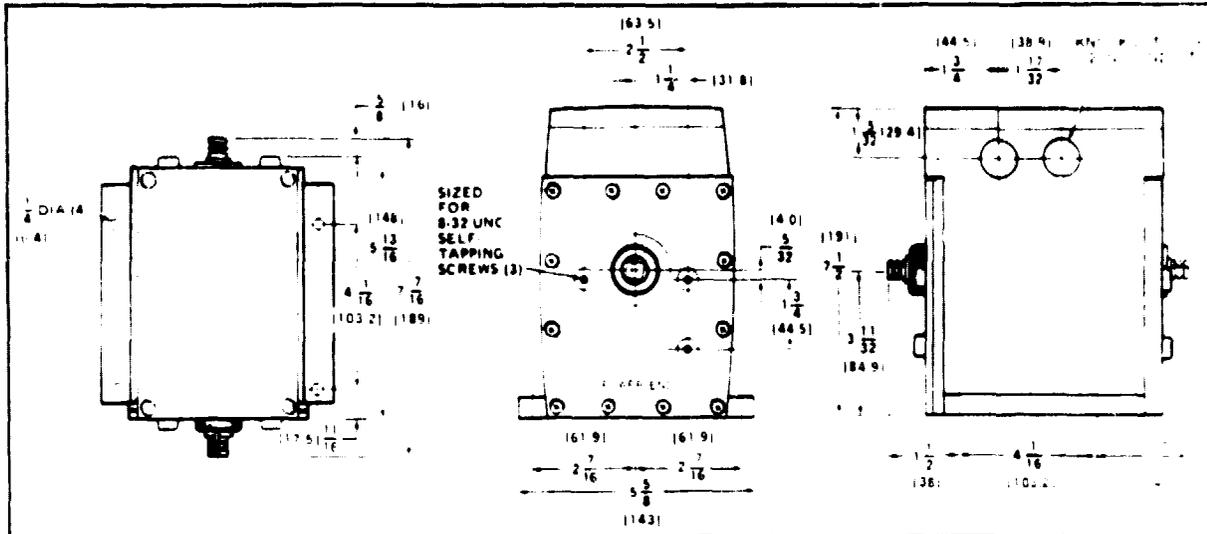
APPROXIMATE DIMENSIONS OF M941 MOTORS IN INCHES (MILLIMETERS SHOWN IN BRACKETS)
